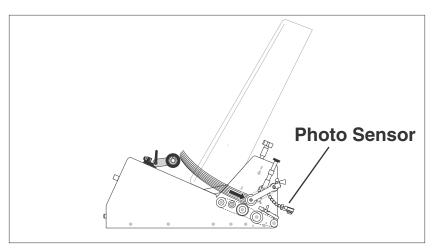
Adjusting Photo Sensor for Perpendicular Position
